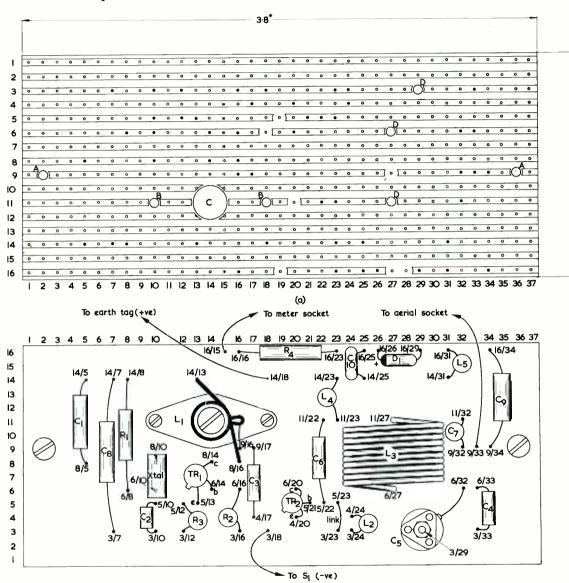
(a). The copper side of the Veroboard after the strips have been cut and the holes drilled (b). The plain side of the Veroboard with components mounted. Each connection has a two-figure code, the first figure indicating the strip and the second figure the hole along the strip
